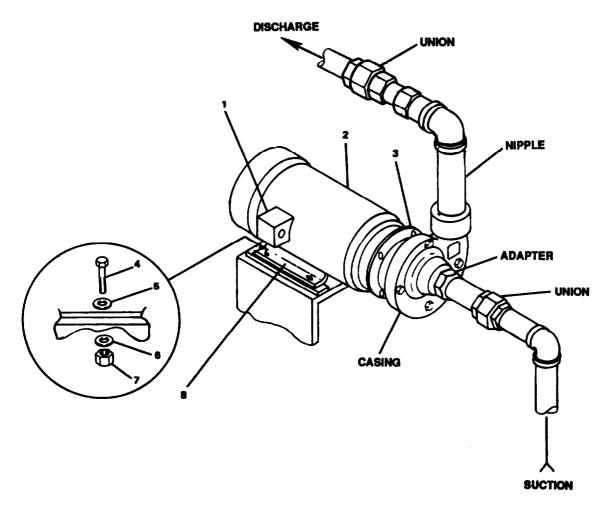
Pump Assembly (Reduction Gear Cooling Water).
